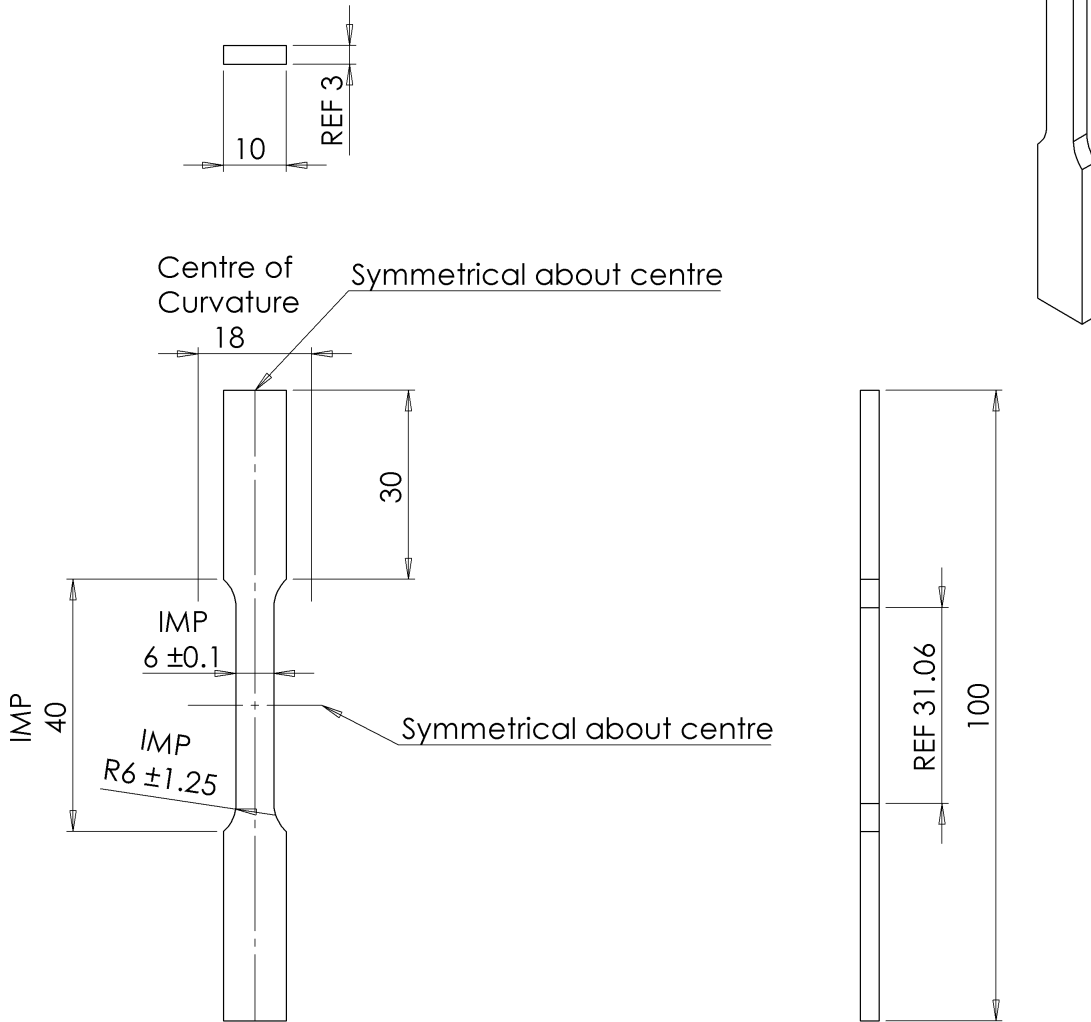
Tensile test design for plate 17DF41, 3mm thickness S960 UHSS, 6mm wide, gauge length as specified by the ASTM [84]
